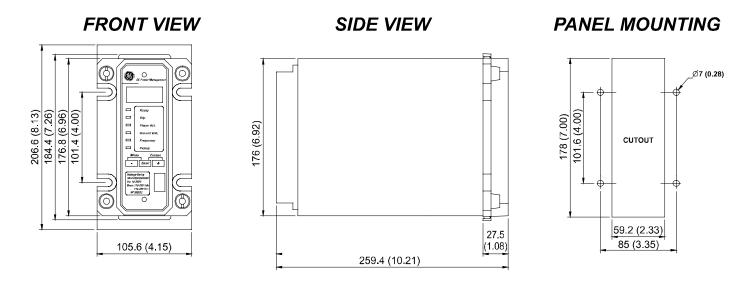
B. MOUNTING AND DIMENSIONS DRAWING FOR MIV MODELS WITHOUT DEPTH REDUCING COLLAR
